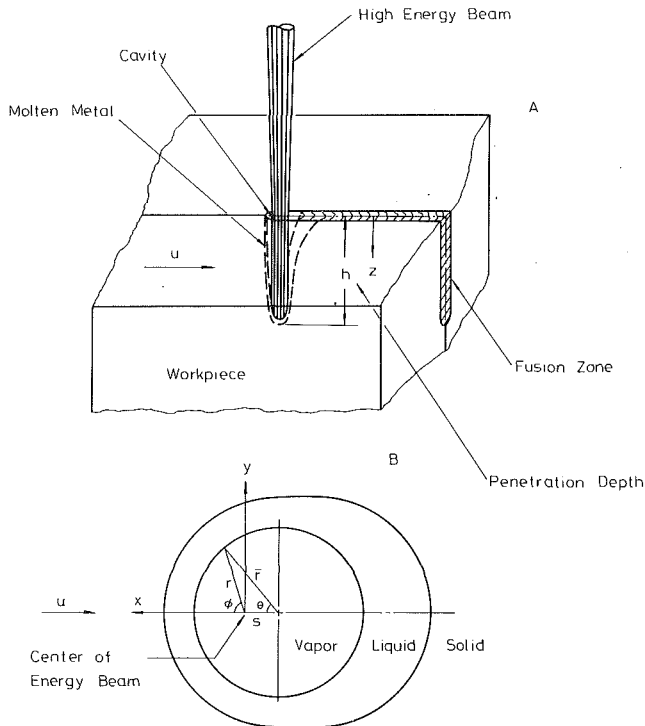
Schematic sketch of (A) the high-energy beam welding process, and (B) the coordinate system
